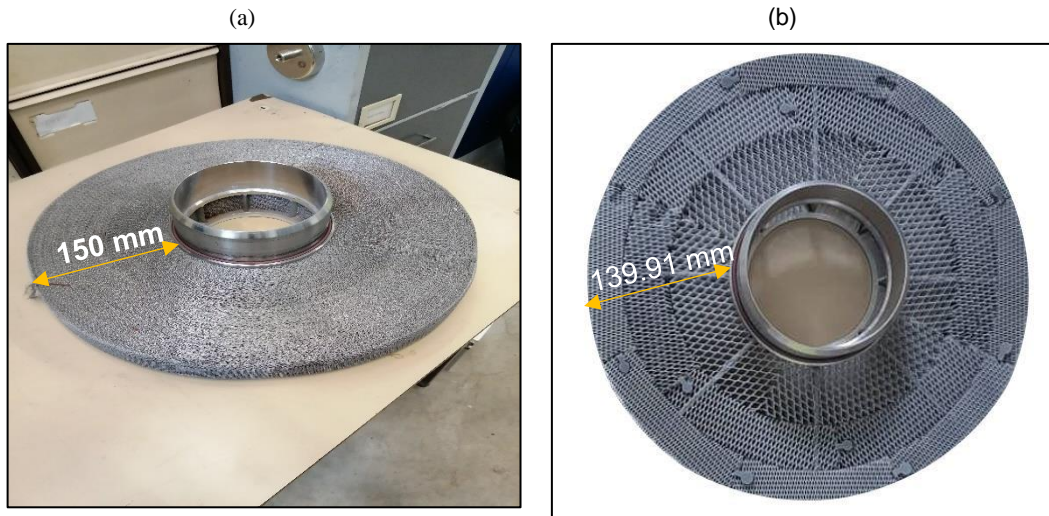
Photo showing the radial length of (a) the stainless-steel packing (b) 3D printed packing
